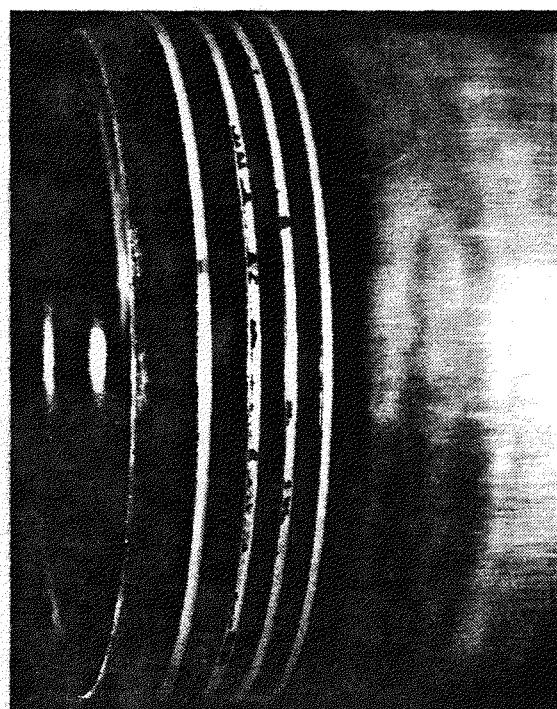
Ringface coating condition - 262 hours - power assembly 1.
